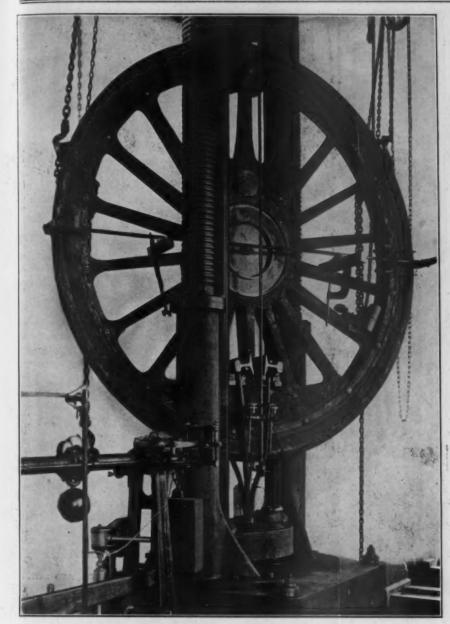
DRIVING WHEEL IN RIEHLE TESTING MACHINE.
